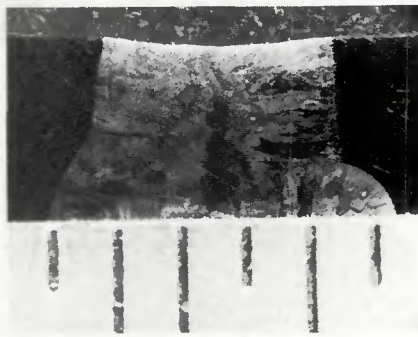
Weld UG 14(100)-22, 5G position, zero root opening, zero mismatch. 1 mm scale (reduced 53% on reproduction)
